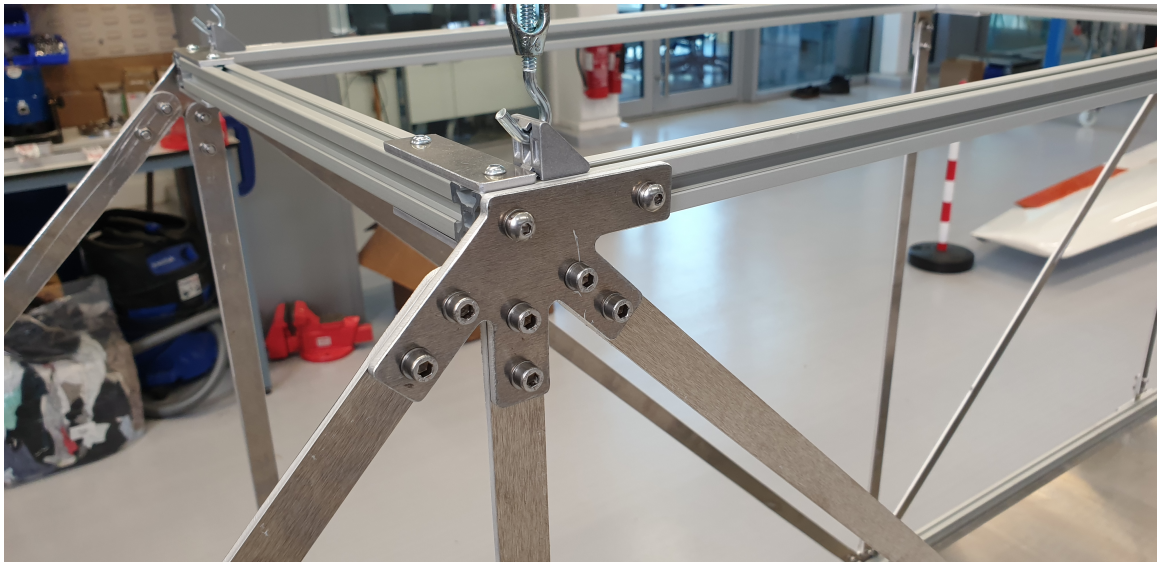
Example of the joint components of the bridge connecting the struts to the deck and upper frame
